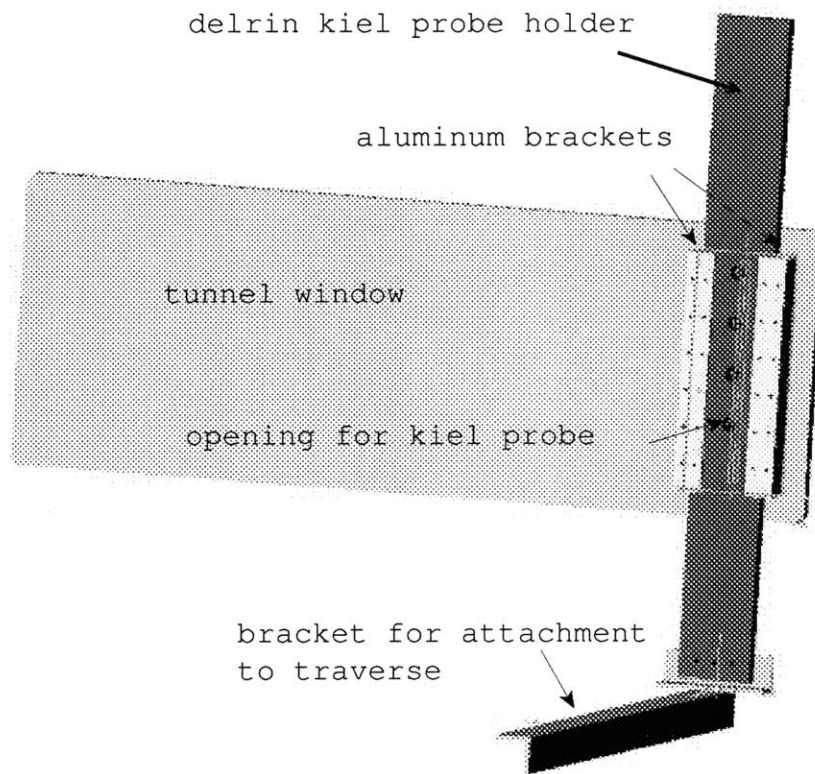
CAD drawing of the front of the kiel probe movement system. This view shows how the pieces attach to the front of a specially modified tunnel window. The delrin piece holds the kiel probe and slides in the Z direction for positioning of the probe. Aluminum brackets attach the delrin to the specially modified tunnel window. A bracket is used to attach the system to the traverse.
